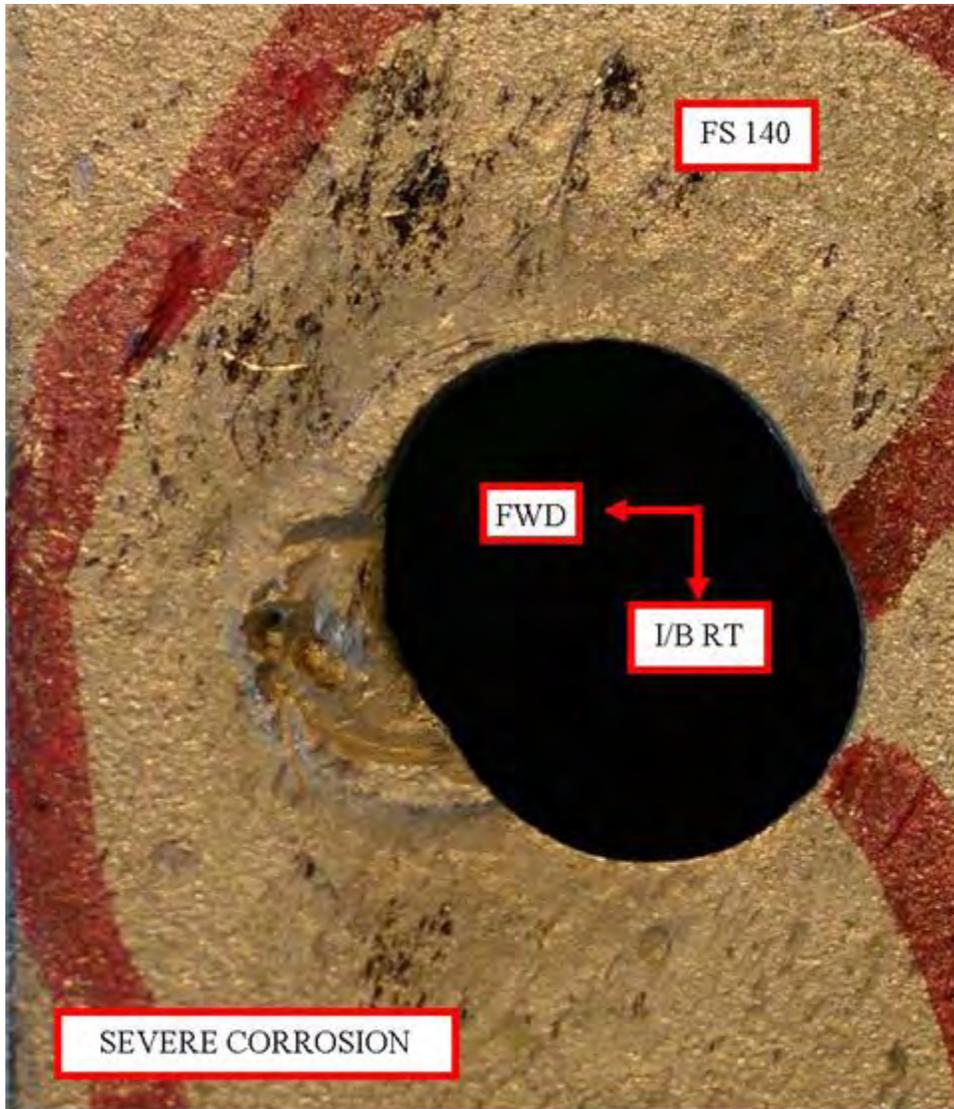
Macroscopic View of Wear on the Right Center Body Bulkhead FS 140
